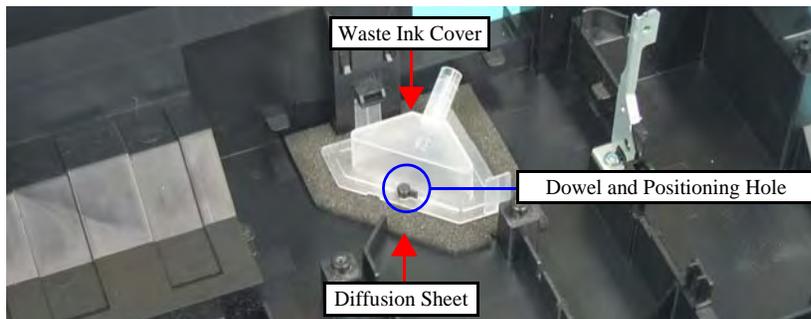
Removing the Waste Ink Cover and Diffusion Sheet
